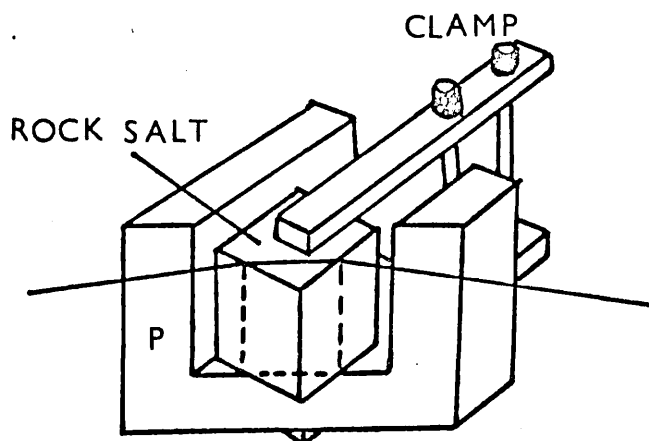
Jig used for cutting (110) faces of rock salt.
